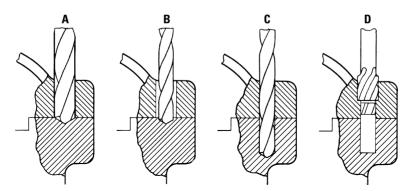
Using the work as a jig. In (A) the same drill used for the bolt holes is used to cut a conical spot in the base. This forms a starting point for the smaller tap drill, as shown in (B). In (C), the cap and bearing are clamped together and drilled by means of a tap drill, after which the tap drill is removed and a counterbore is used to enlarge the holes for the bolts, as shown in (D).
